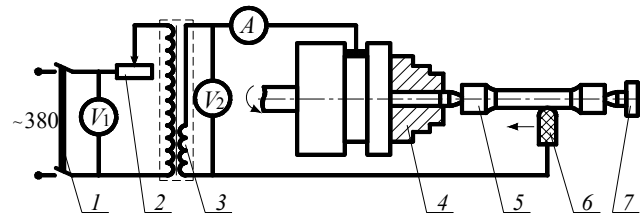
Schematic circuit of EMT on turning machine: 1 - voltage switch, 2 - rheostat, 3 - voltage reduction transformer 4 - grip, 5 - specimen, 6 - special hold-down attachment for T15K6 alloy plate, 7 - toolhead
